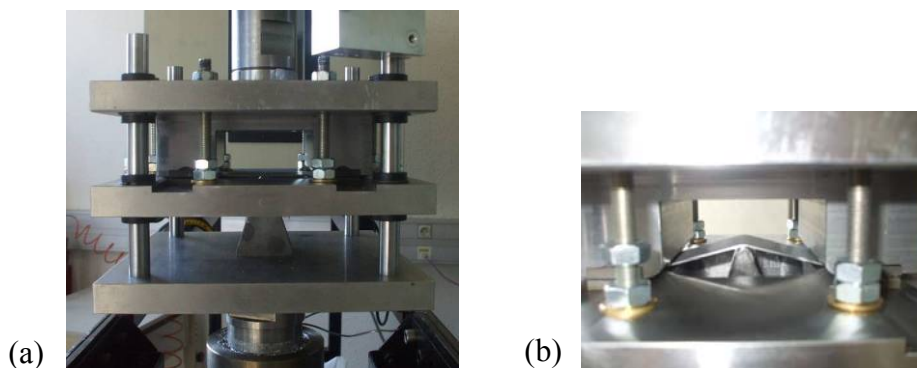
(a) Stretch bending tool after machining, (b) sheet bent under tension.
